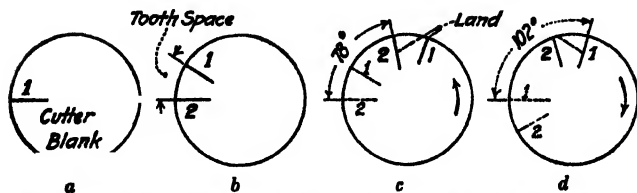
This figure illustrates the method of laying out two adjacent tooth-face lines and indexing these lines to their proper position. (These views are from footstock end with the index head on the left end of the table, as in the Brown & Sharpe machine). Remember, when indexing for a certain number of degrees, that one turn of the index handle moves the work 9 deg.
